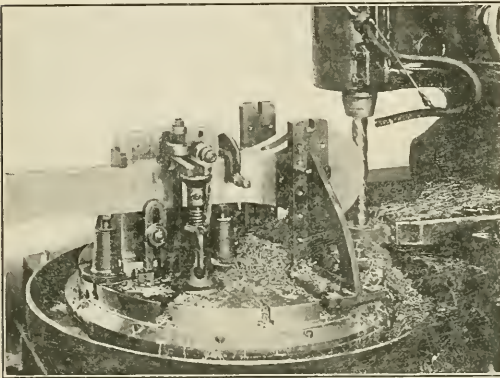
Milling Jaw in Side Rod Knuckle Pin Connection
